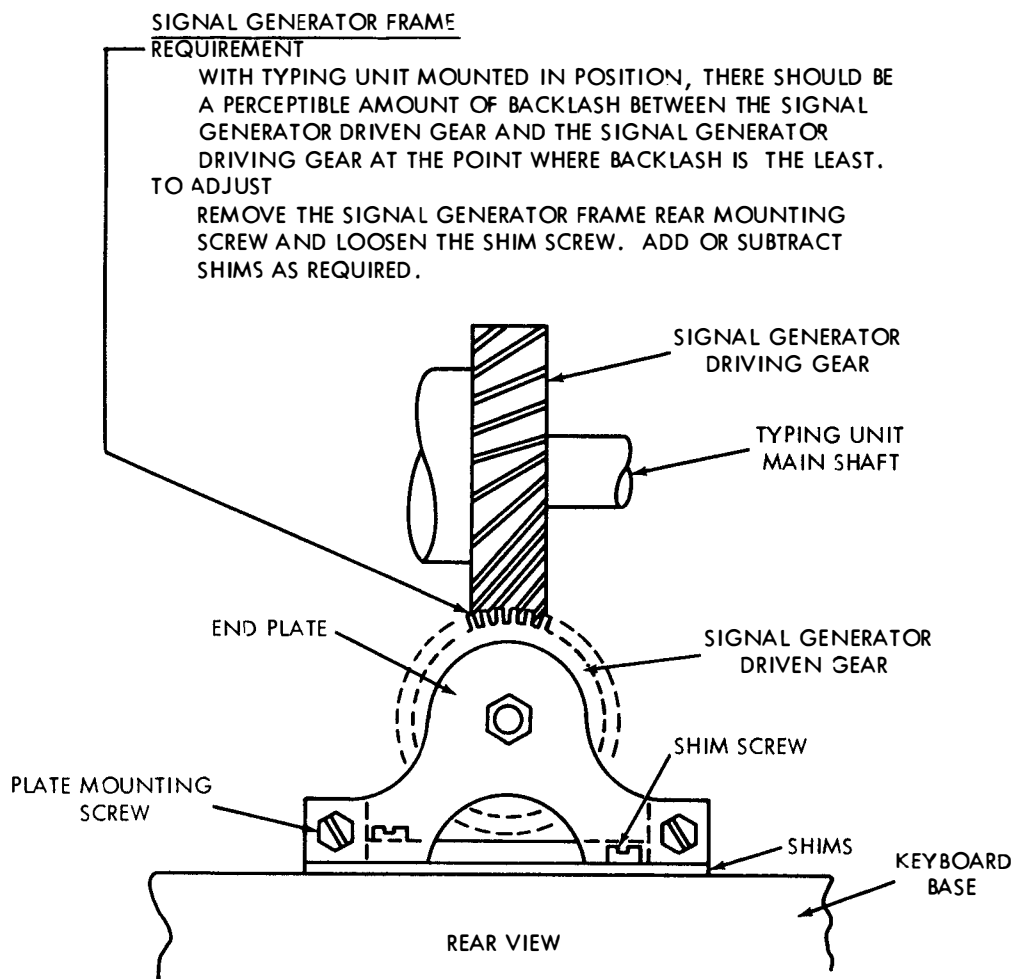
D. Keyboard MX-1114C/UG and MX-1677A/UG and Automatic Typewriter, Signal Generator Frame Mechanism
